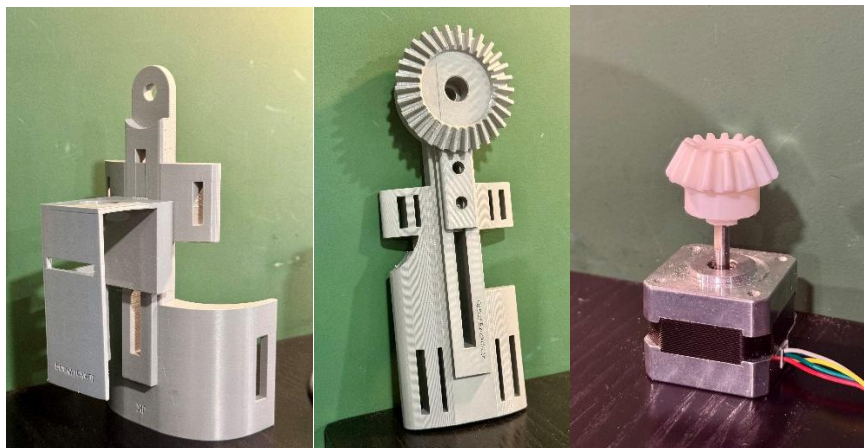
Exoskeleton Parts: Upper arm, Forearm and pinion Gear
